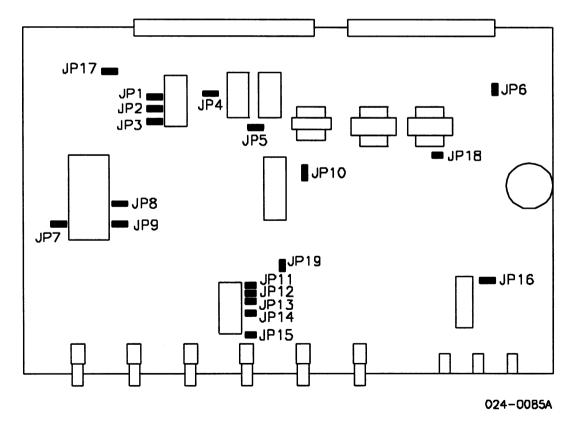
Model 66 PCB Jumper Locations, Revisions F through H
